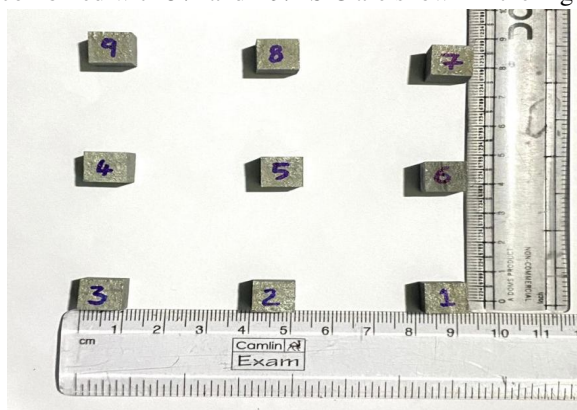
Machined samples of AL7075 Combined with 5% SiC
